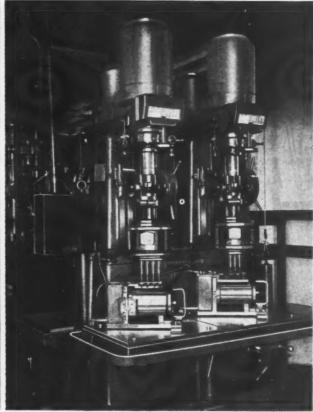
Drill Press with Two of Four Spindles Placed at Rear to Form Second Production Line
